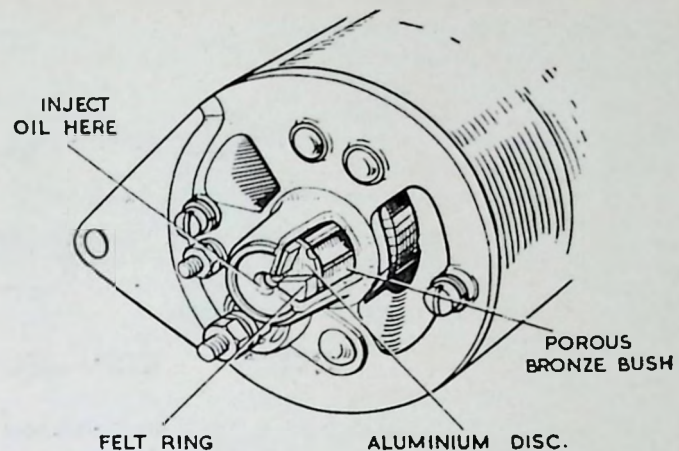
Commutator end bearing cut away to show details of the lubricator.
